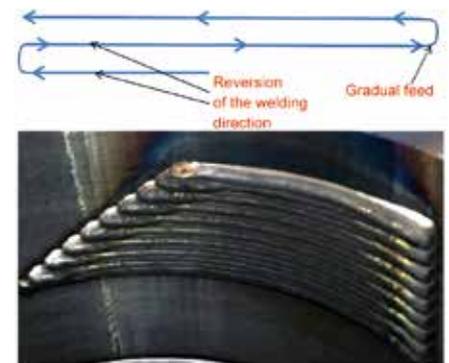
• Cladded surface obtained by the “Patch” mode including reversion and welding speed correction.
